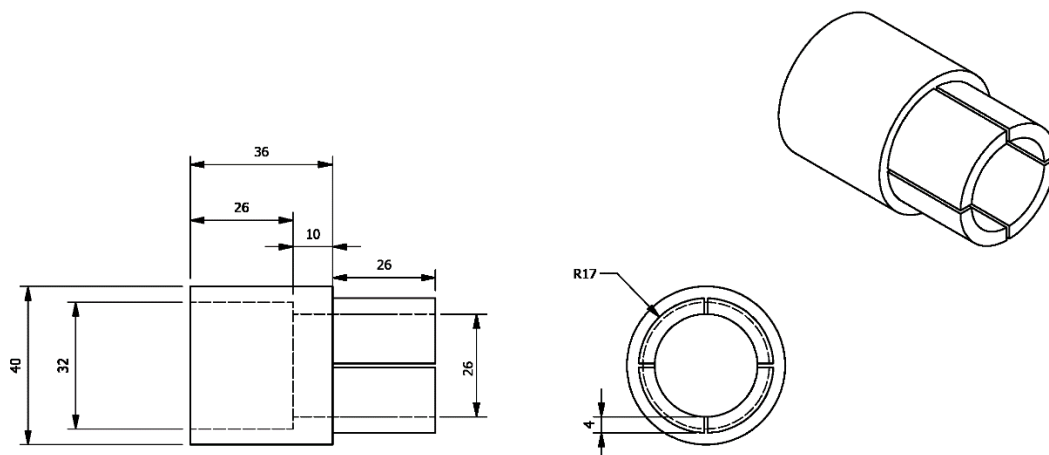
Nozzle C design, showing sleeve section for mounting to pipe and tabbed section.
